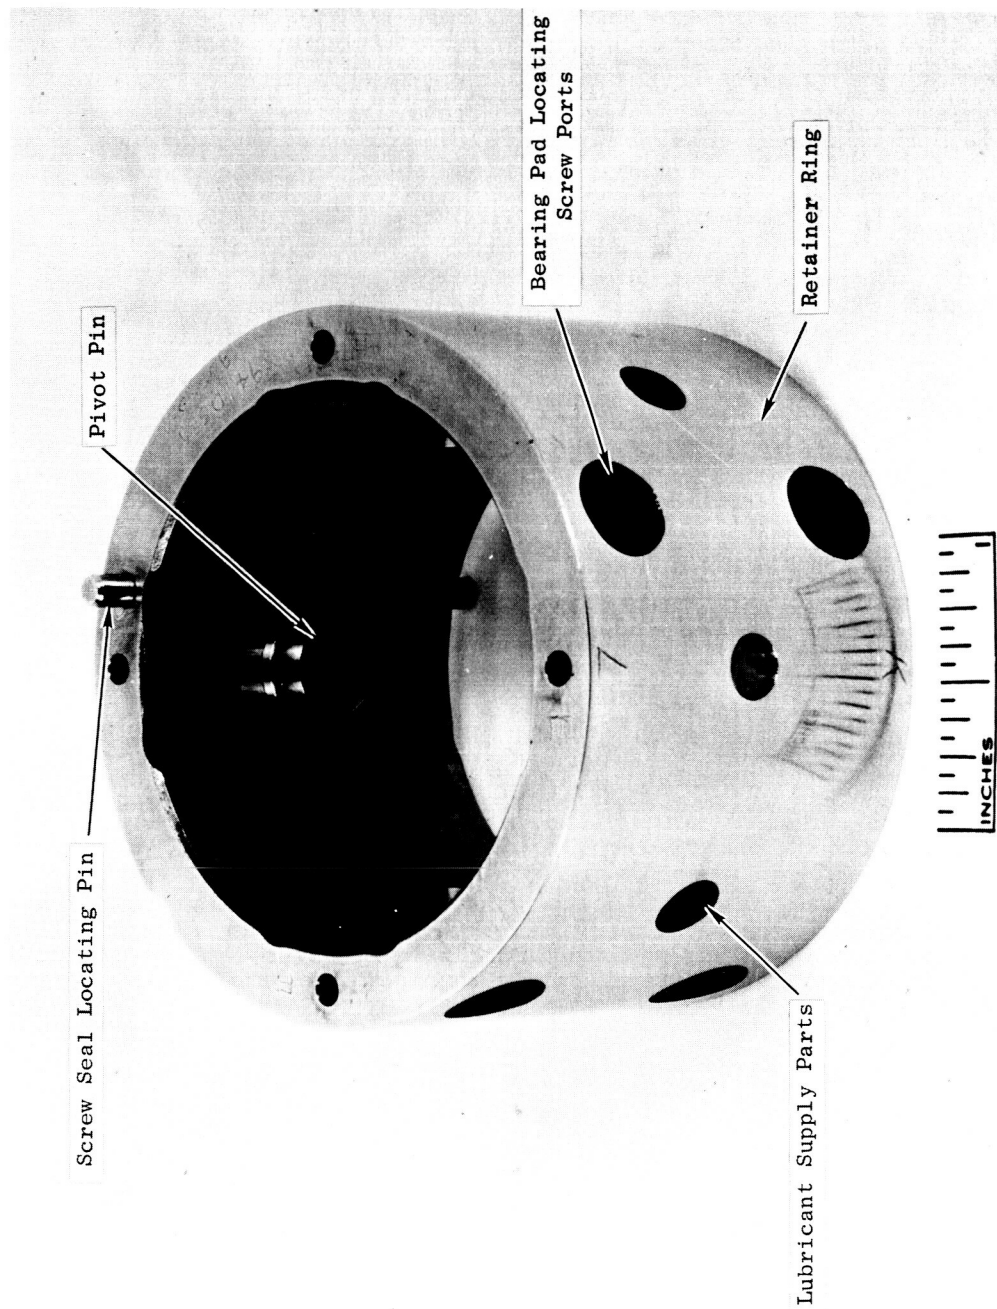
Self-Aligning Pivoted Pad Bearing Retainer Ring Sub-Assembly.
